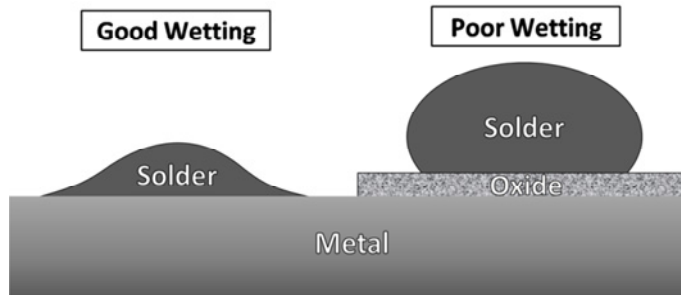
Illustration of good and poor wetting of solder on a metallic surface. .
